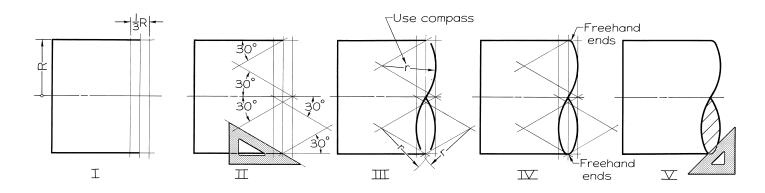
Steps in Drawing S-Breaks for Solid Shaft.
